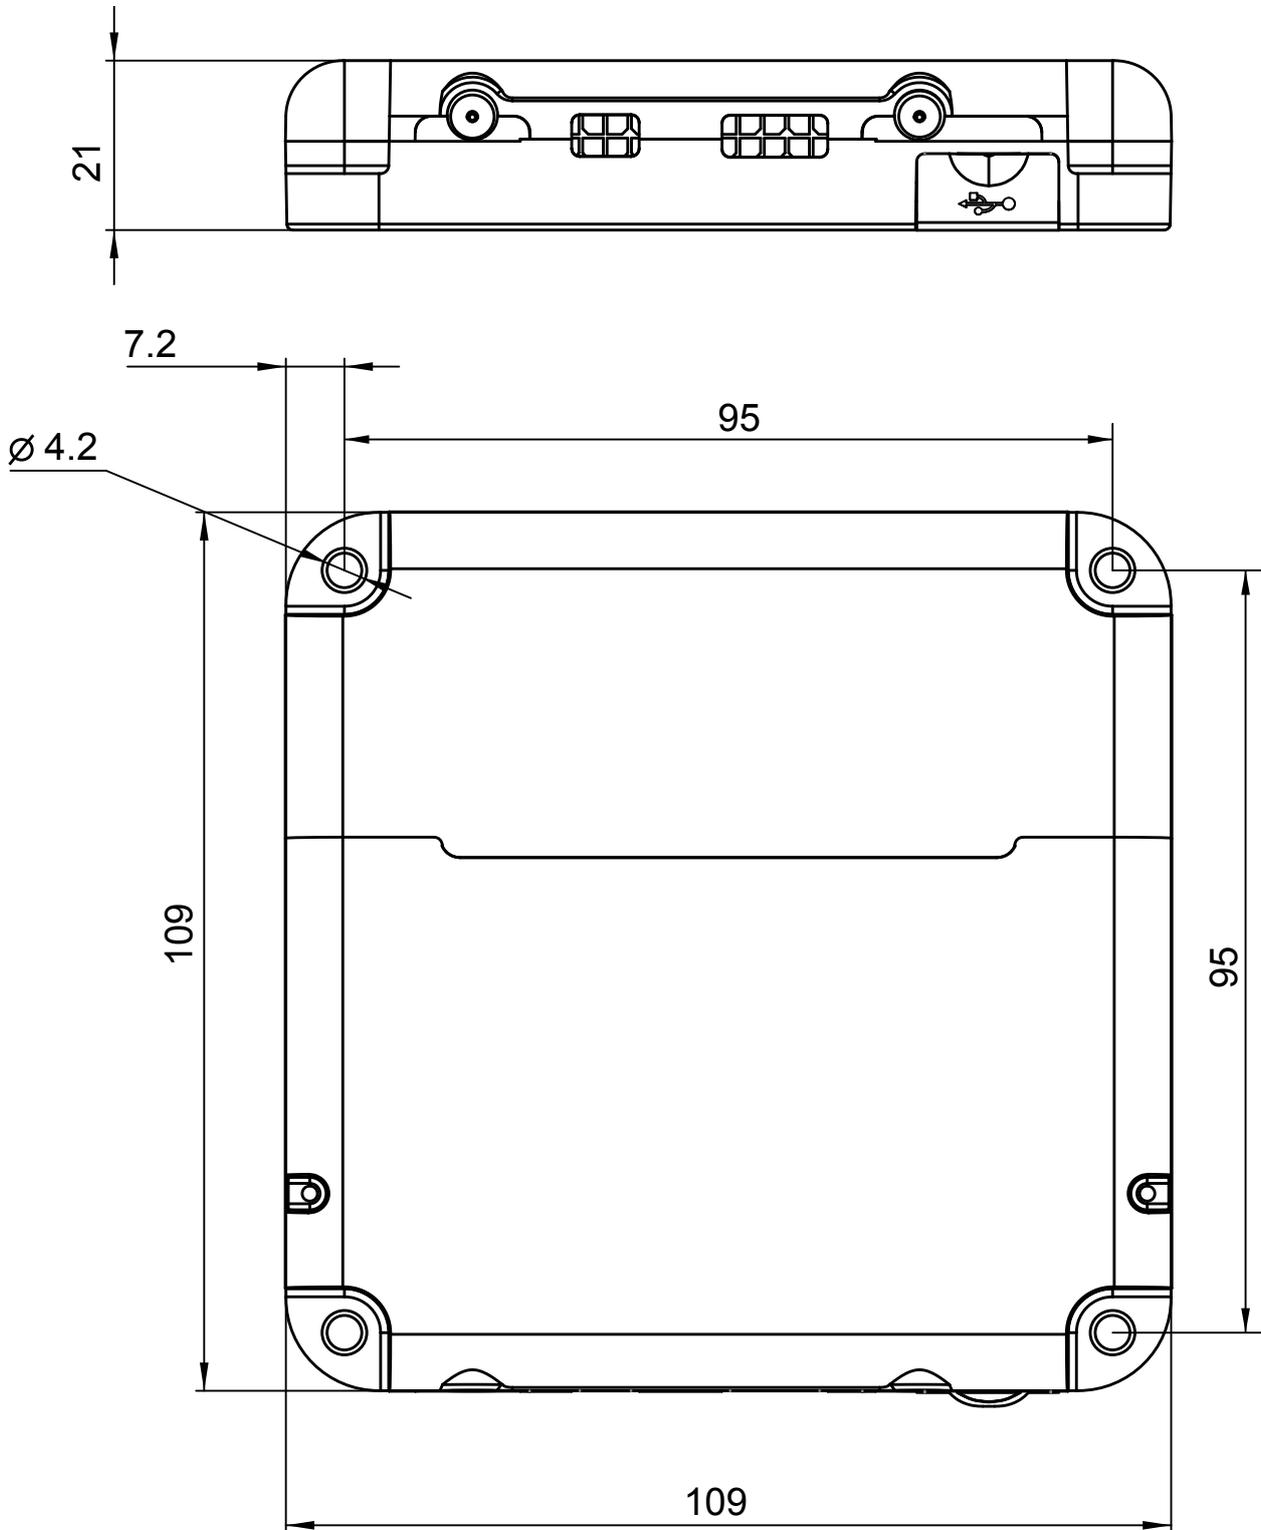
iON Pro navigation user terminal dimensional drawing
